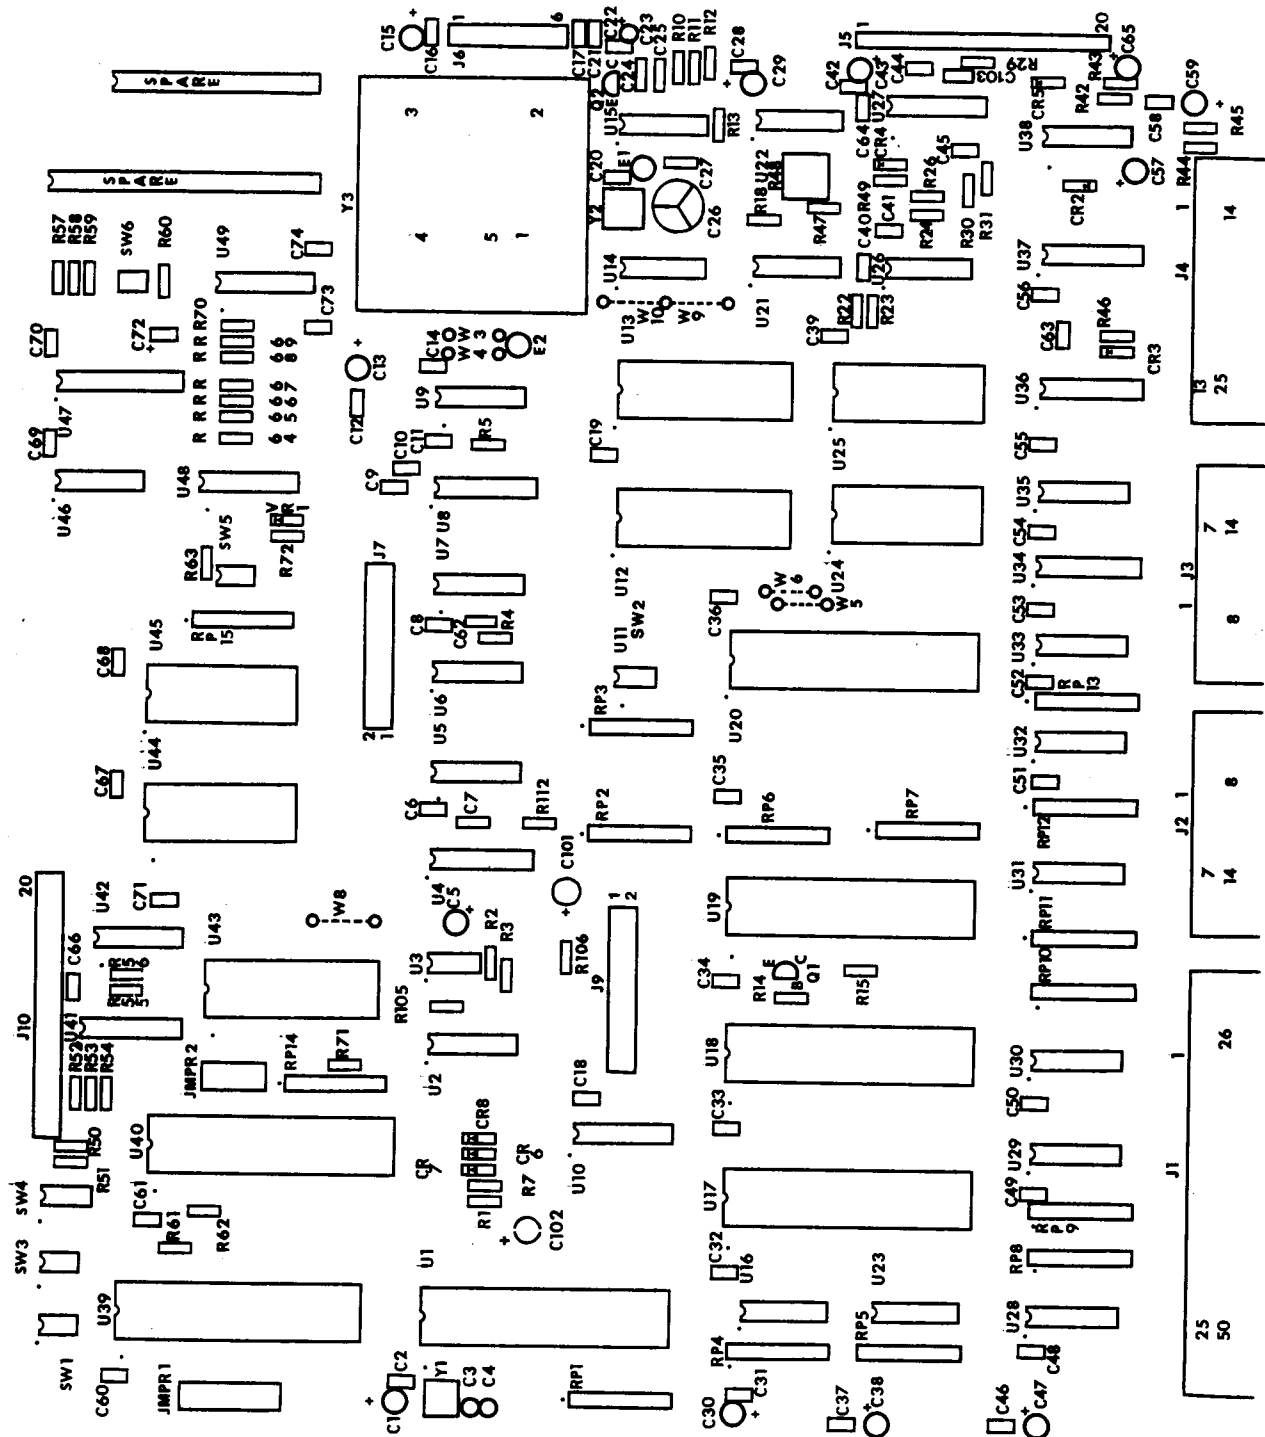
ASSEMBLY DRAWING - MICROPROCESSOR
